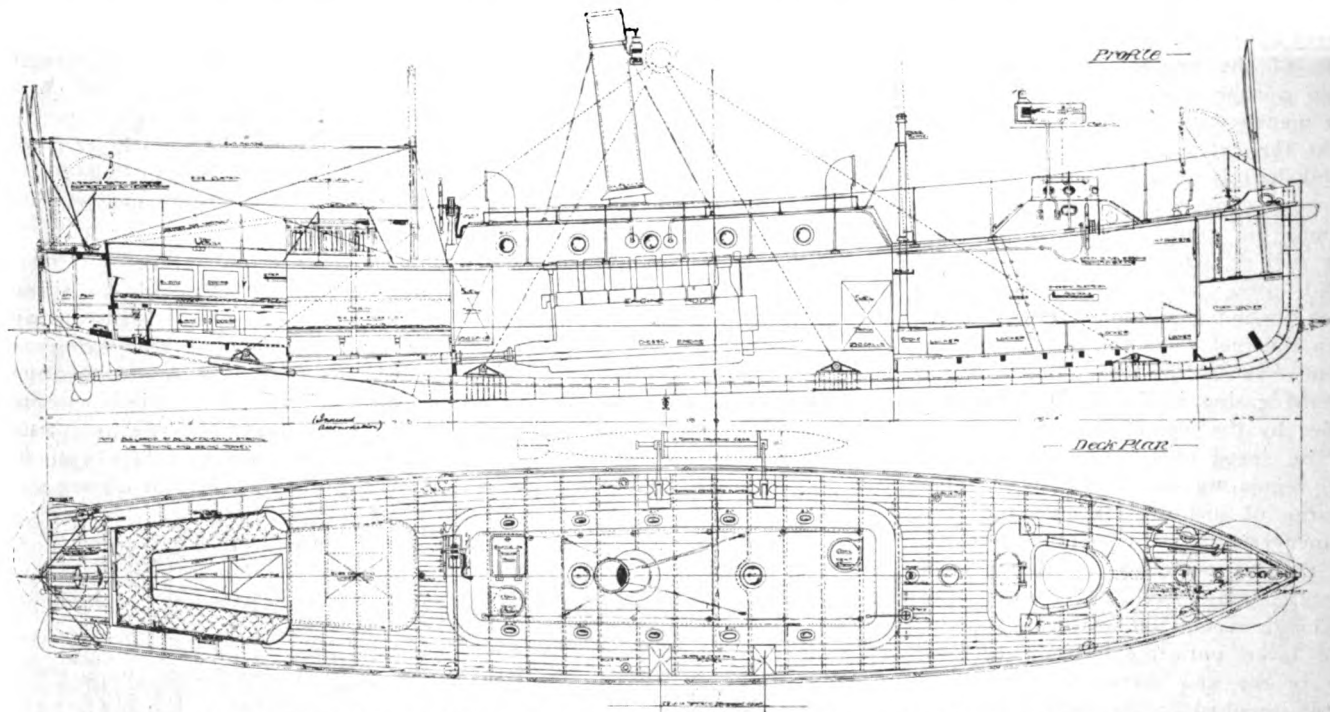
PLATE VI—FIFTY-SIX-FT. PINNACE, BEING BUILT AND ENGINED BY MESSRS. J. SAMUEL WHITE & Co., E. COWES
